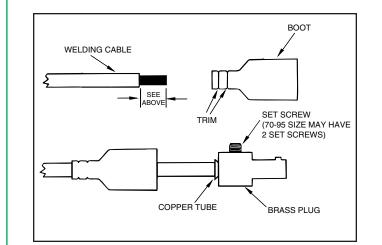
Installing Twist-Mate Cable Plug.
